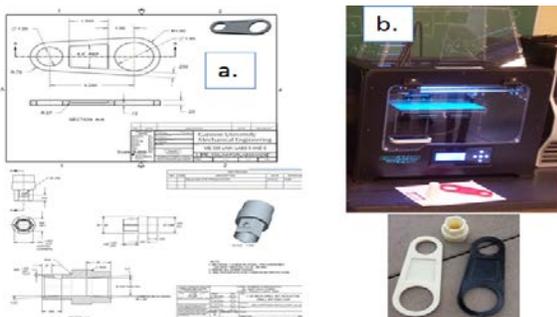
Lab 5, 3D Printing, a) link and drill bit end cap, b) one of the FDM printers used for rapid prototyping with samples shown.
